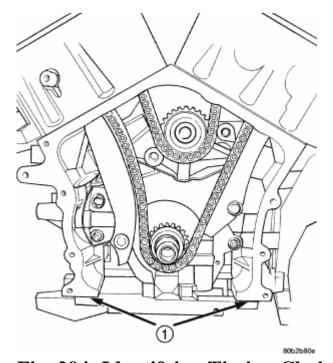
Identifying Timing Chain Cover RTV Sealing Points Courtesy of CHRYSLER LLC
